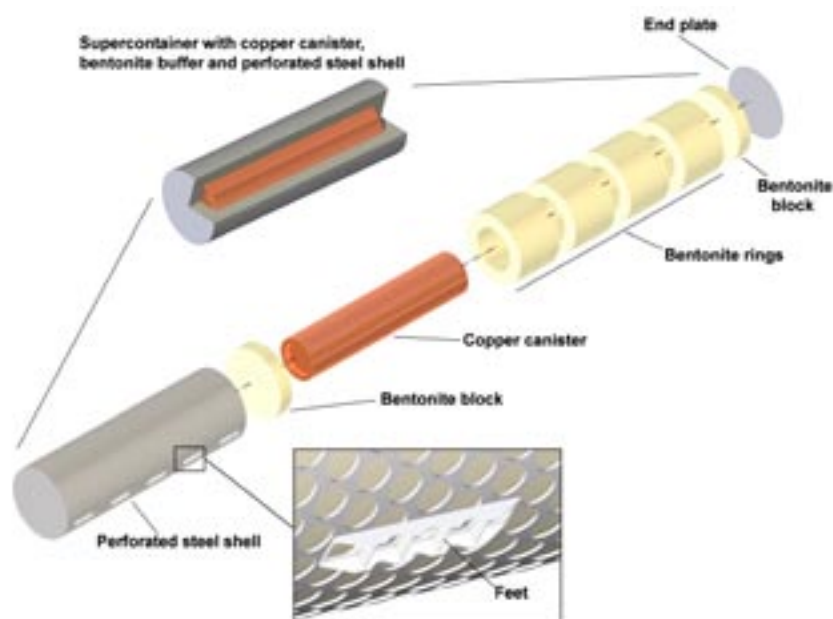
Exploded view of the KBS-3H supercontainer with buffer and copper canister.
